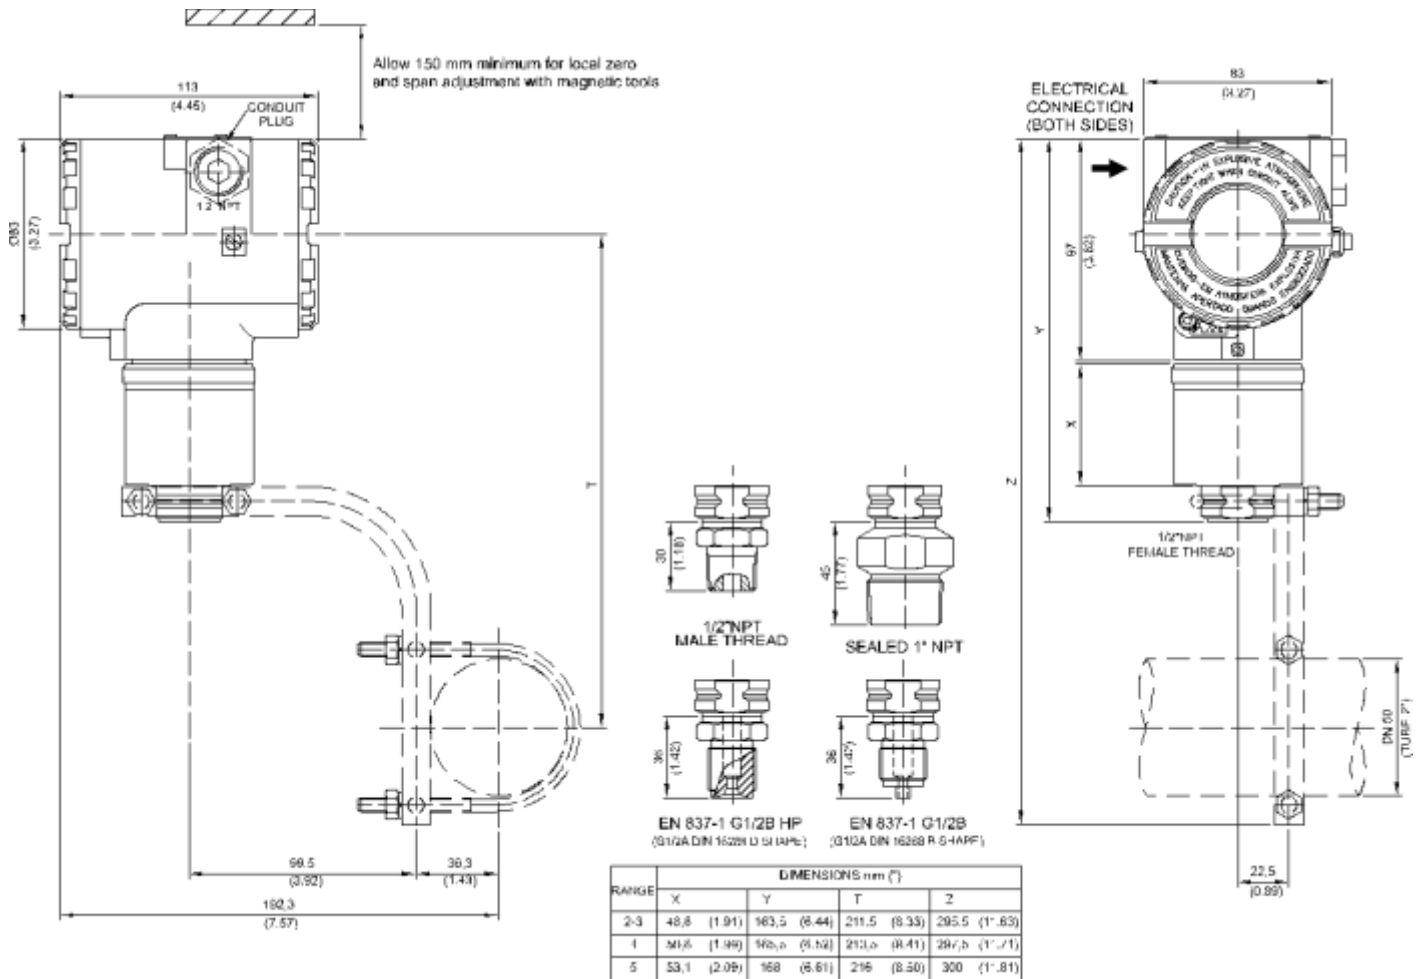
(a) – Dimensional Drawing and Mounting Position for LD291
